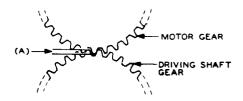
Engagement of Motor and Driving Shaft Gears
